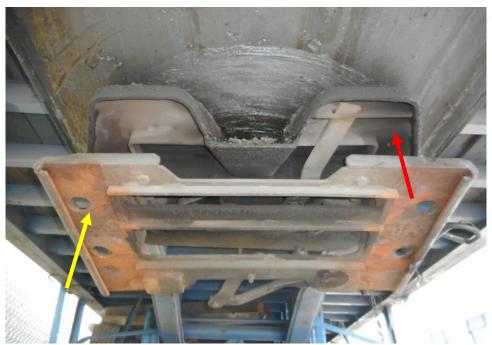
shows a general view of the rear Trailer undercarriage at the time of my inspection. We observed that the fifth wheel unit (red arrow) and the base plate (yellow arrow) that was supposedly mounted on the Motor Trailer had detached and stayed on the rear Trailer after the accident.
